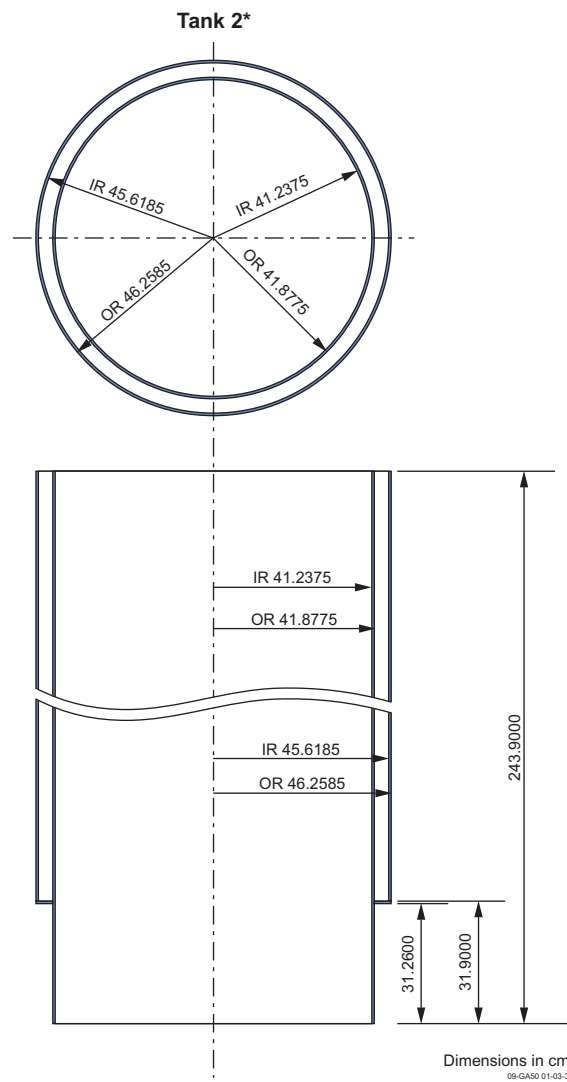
Tank 2* Dimensions Simple Model, Bottom 31.26 cm is the Extended Skirt.
